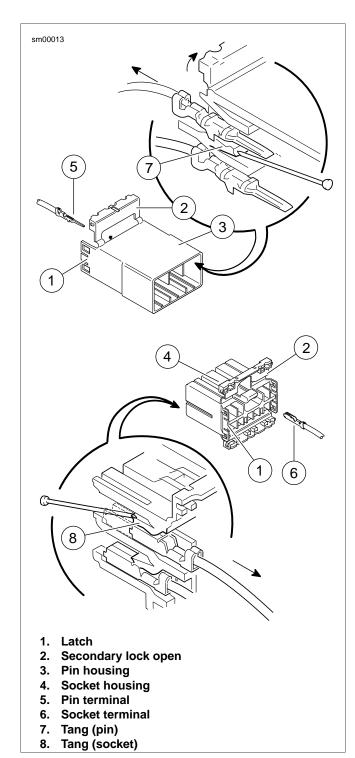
Tyco 070 Multilock Unsealed Connector: Socket and Pin Housings
